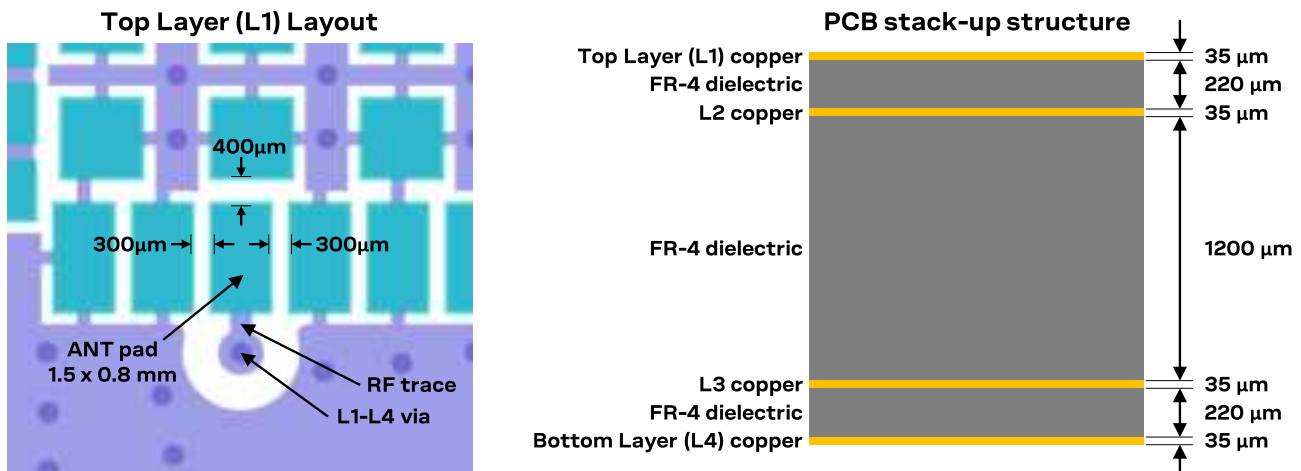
Top layer layout and stack-up structure of the u-blox host PCB for the ANT pad of the module
